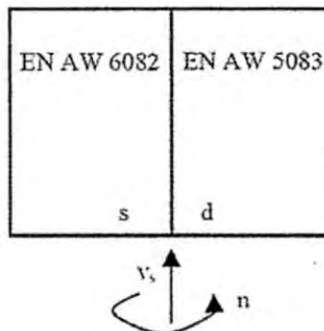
Scheme of the welded materials EN AW 6082 and EN AW 5083
